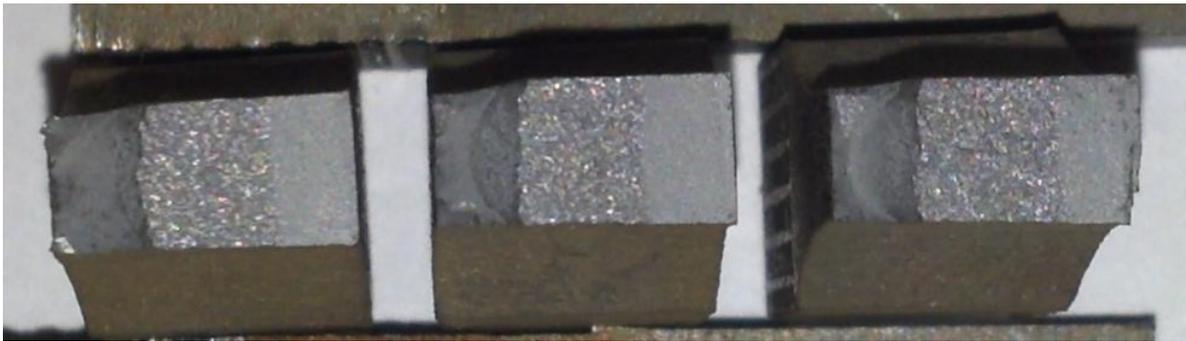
Fracture surface of tensile samples of double pass welds.
